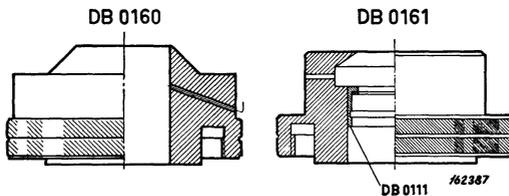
Sectional view of the 6 cm³ couplers.
